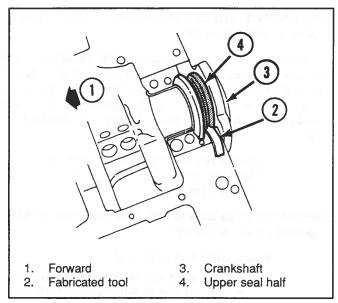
Using Rear Main Seal Installation Tool On Upper Seal
